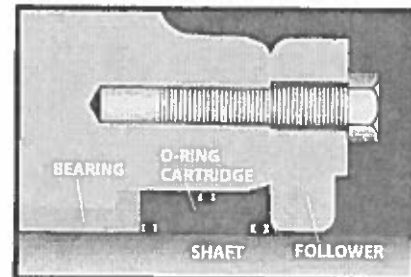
Series 7900 Shaft Seal System O-ring Cartridge
